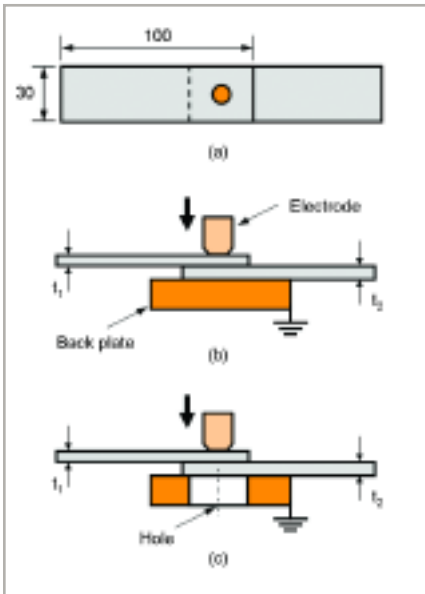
Experimental setup for tensile-shear test coupon. A — Size of coupons (mm); B — single-sided RSW with backing plate; and C — single-sided RSW without backing plate.
